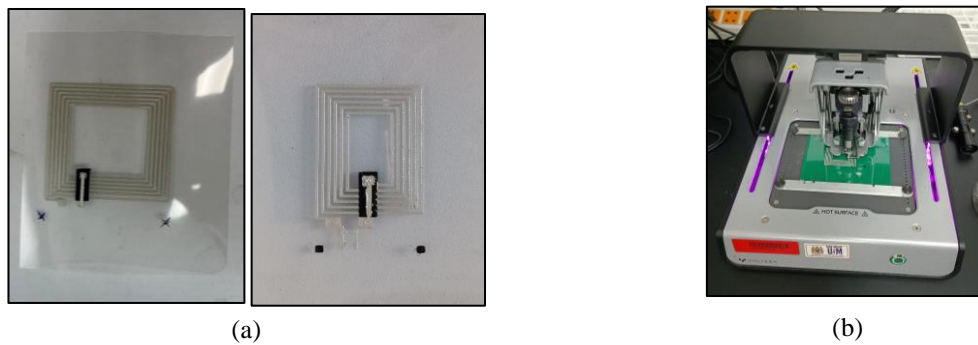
(a) Prototype of Designs 1 and 2 NFC tag antenna (b) Voltera V-One PCB Printer
